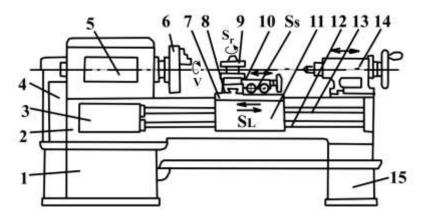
Engine lathe: 1, 15 – legs; 2 – headstock; 3 – teed gear box; 4 – V-belts transmission; 5 – speed gear box; 6 – chuck; 7 – carriage; 8 – sledge; 9 – turning tool-holder; 10 – support; 11 – apron; 12, 13 – screws; 14 – tailstock
